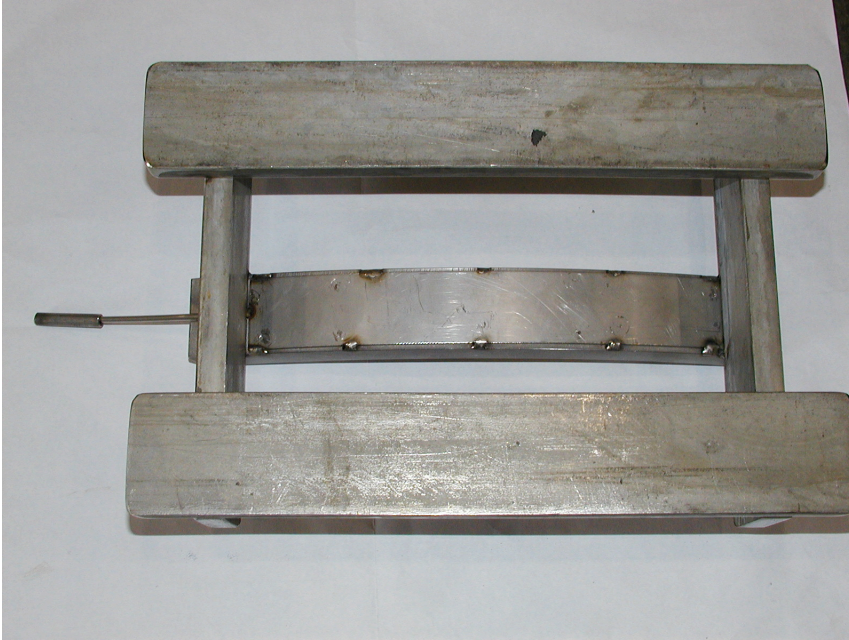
Backside of joint showing the sheetmetal gas purge dam
